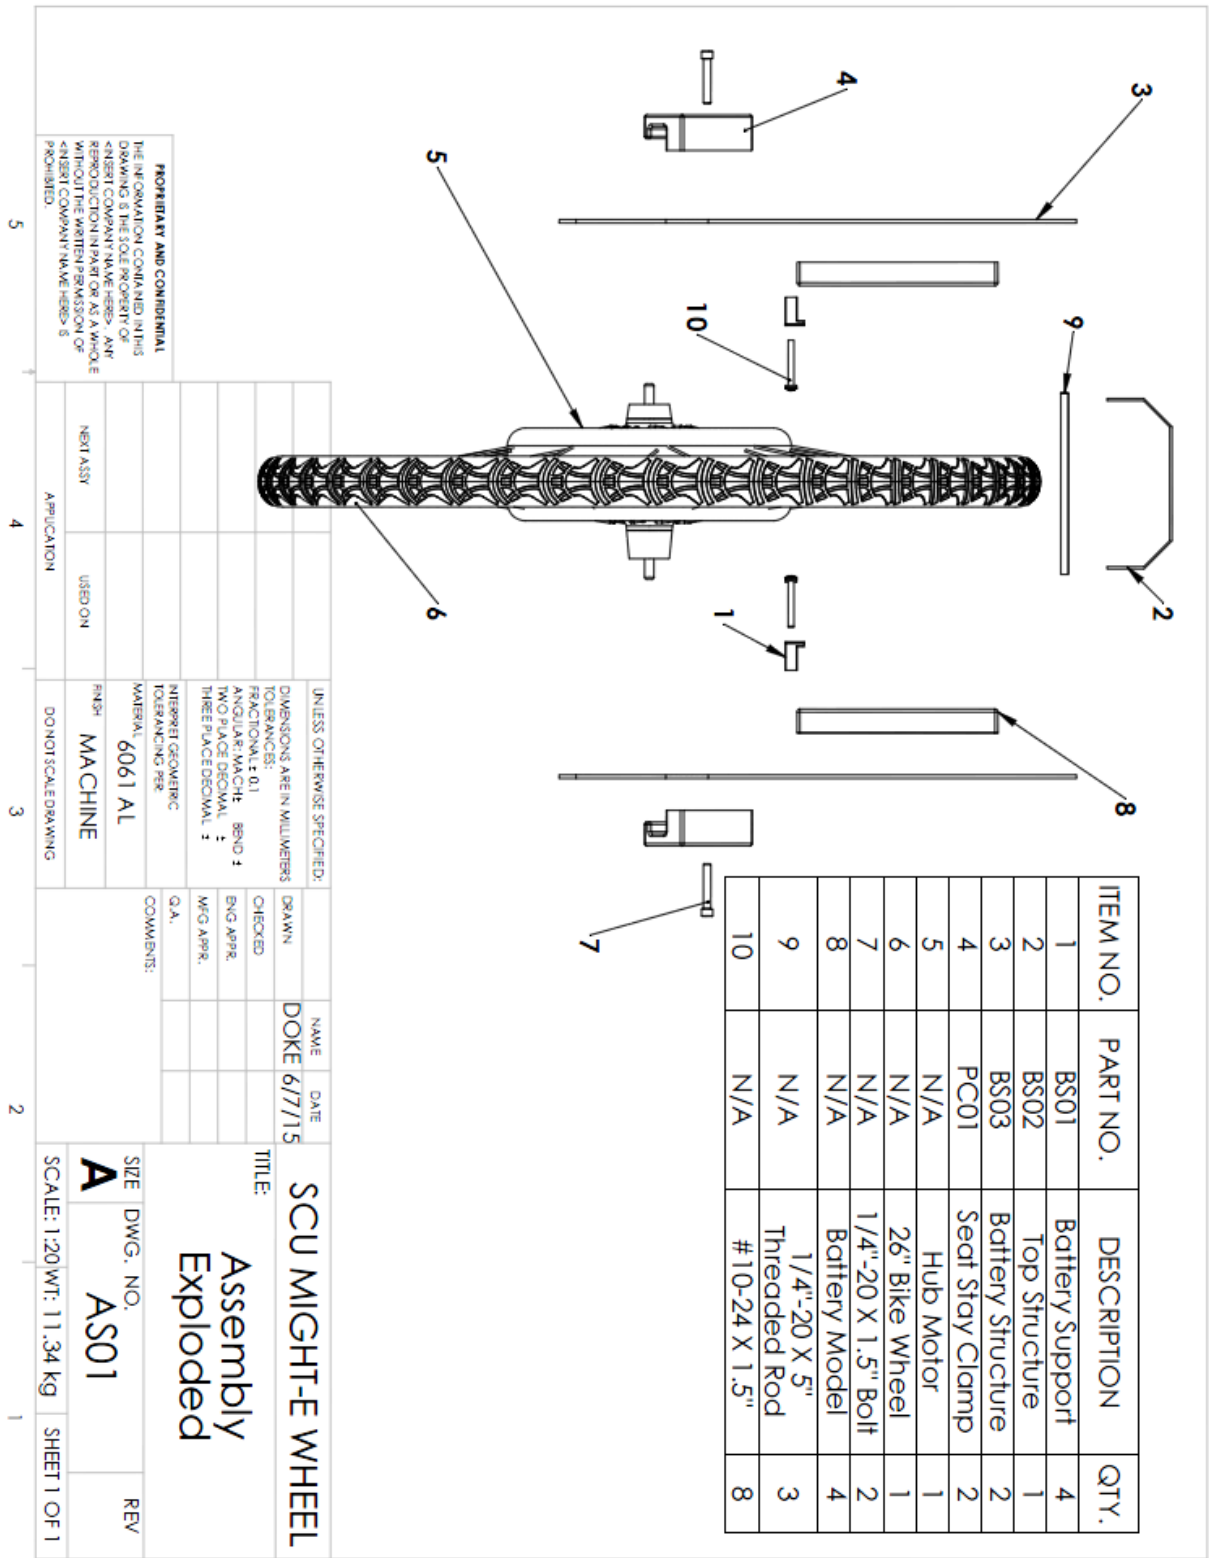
Exploded Assembly Drawing and Bill of Materials
